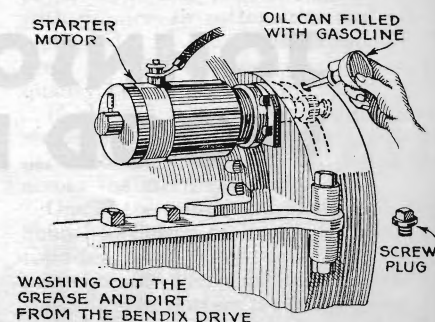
A simple method of cleaning the bendix drive without removing the starter motor.
